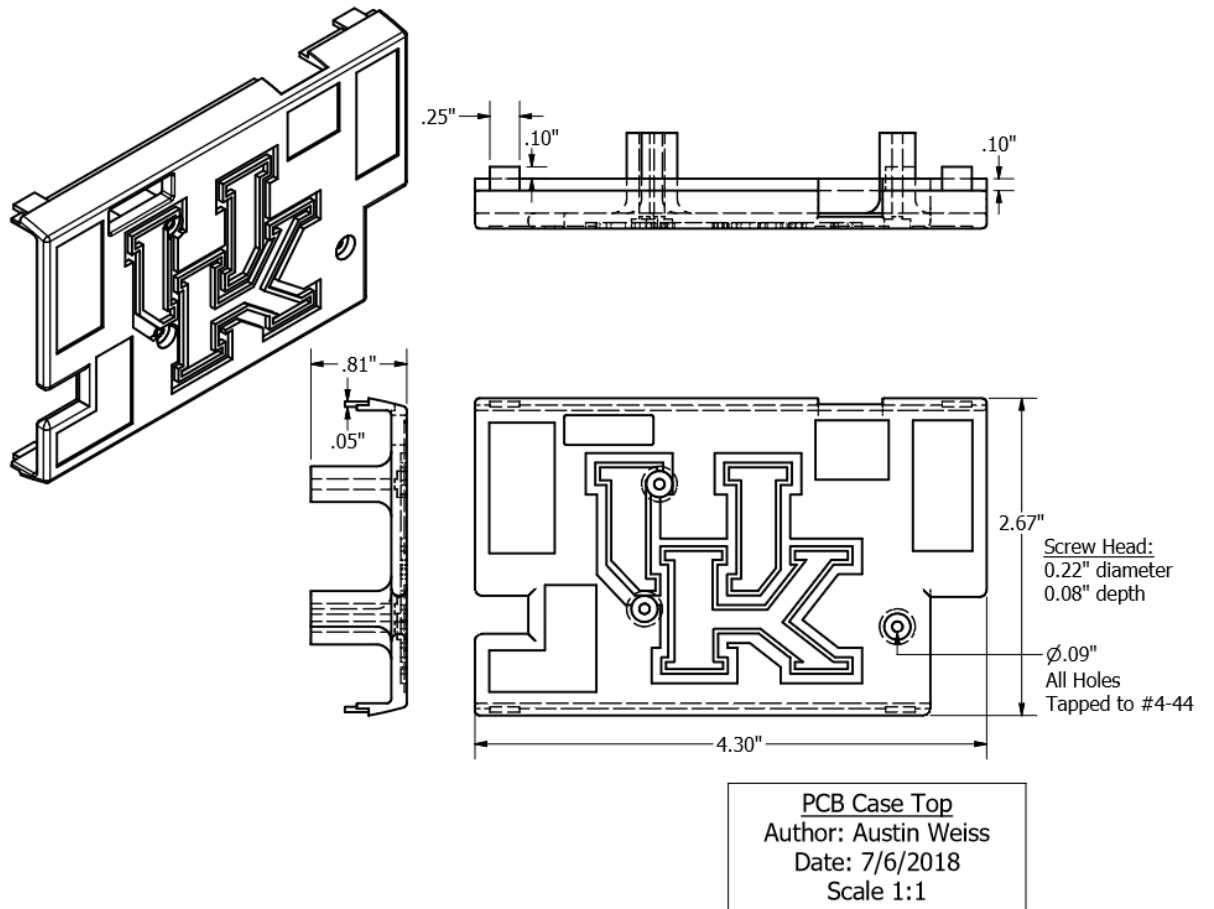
3D printed lid for PCB enclosure fastens to the bottom piece with 3 #4 machine screws.
